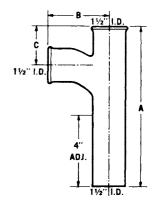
Adjustable Sanitary T (Plain End Outlet)
